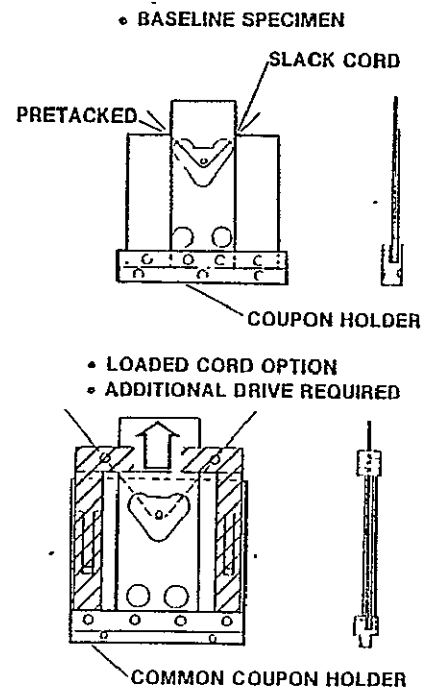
Ultrasonic welding experiment test specimen concepts.
